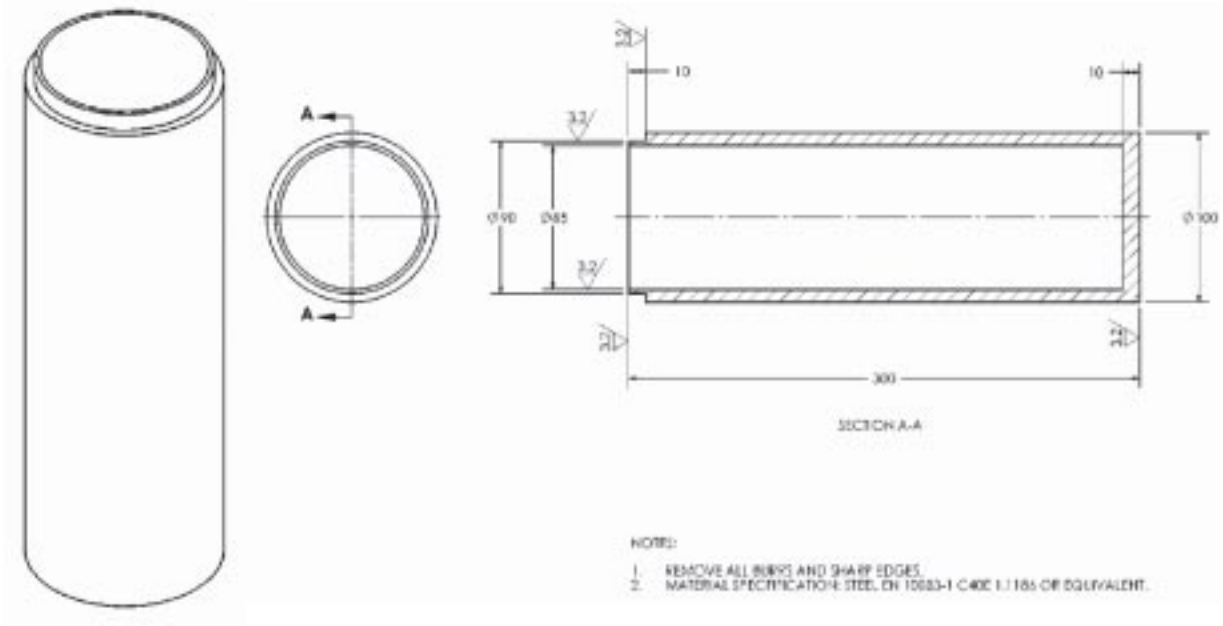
1/2 Shaft Seal Insertion Tool (Section 180-0020, SUSPENSION SYSTEM- FRONT SUSPENSION)
